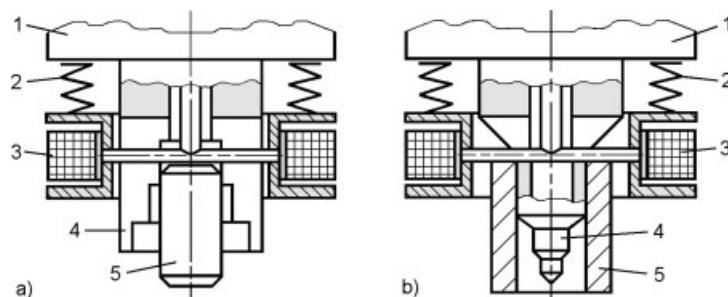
Electromagnetic gripper with adapted workpiece receivers
